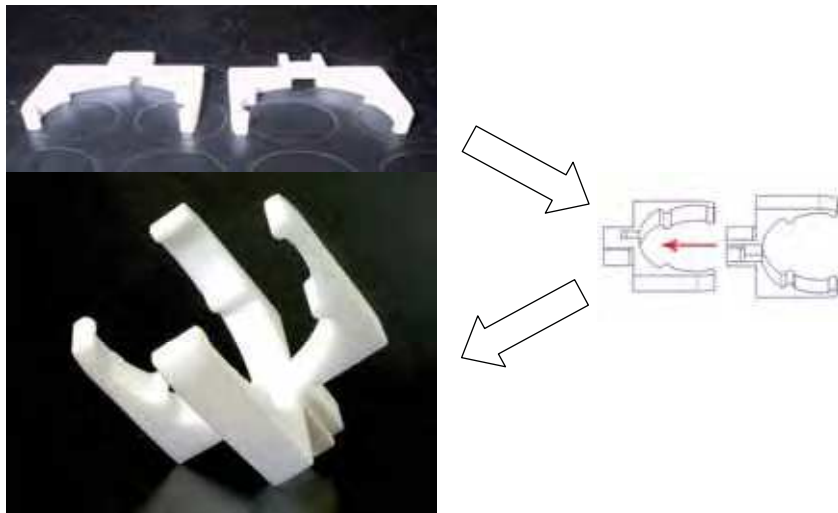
The eye-ball support is formed by two PTFE parts mated together (final design).
